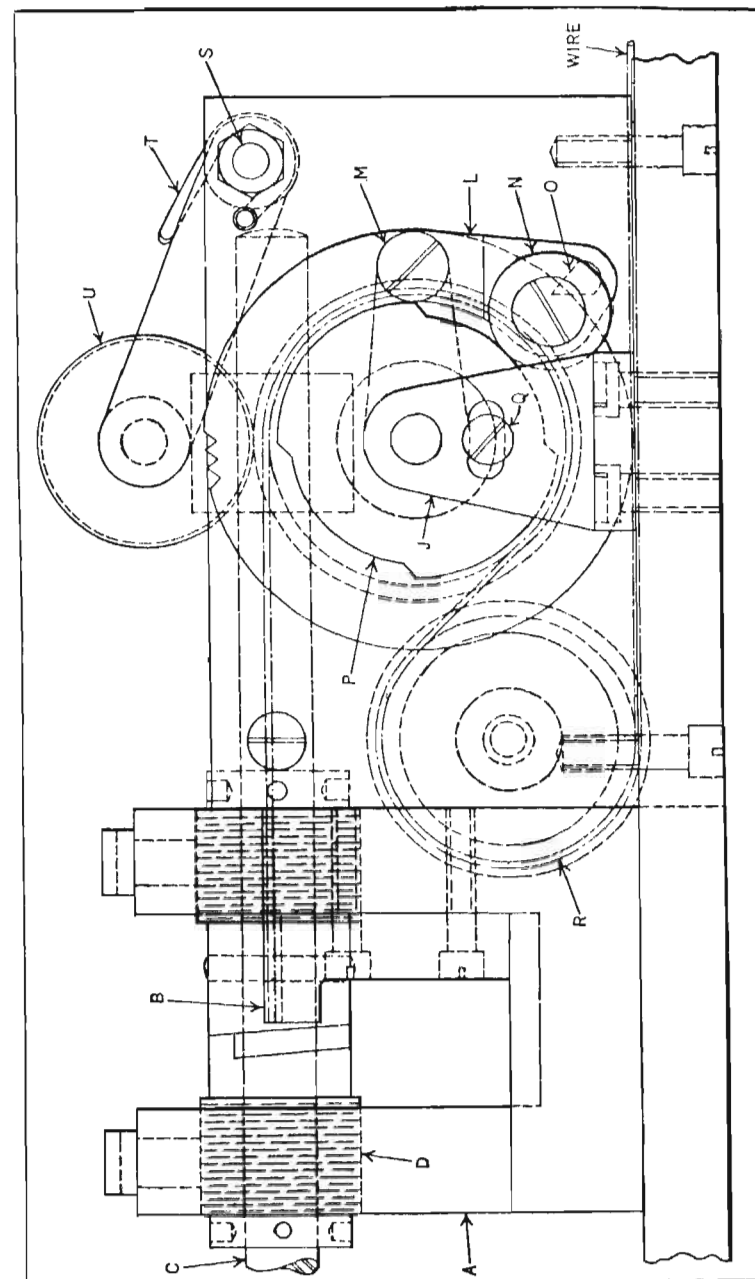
Intermittent Feed Mechanism on Machine which Cuts off Wire at the Rate of 120 Pieces per Minute
